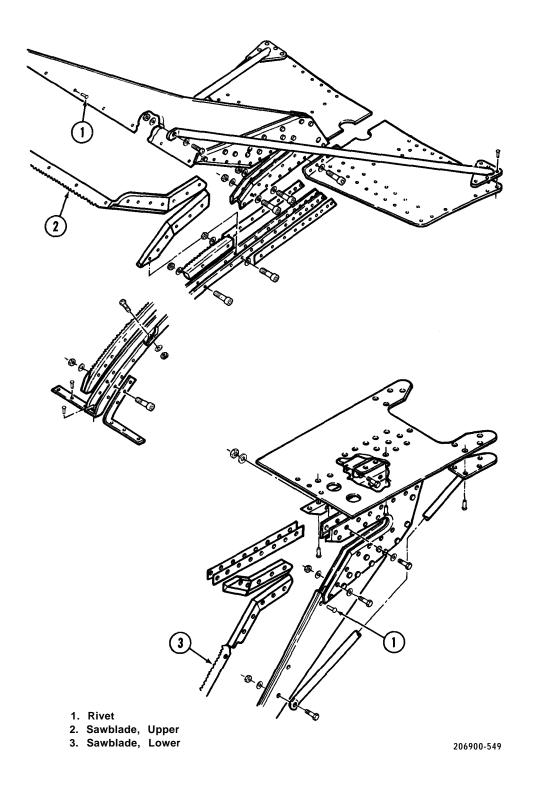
Removal – Sawblade, Cutter Deflector (Upper and Lower)
